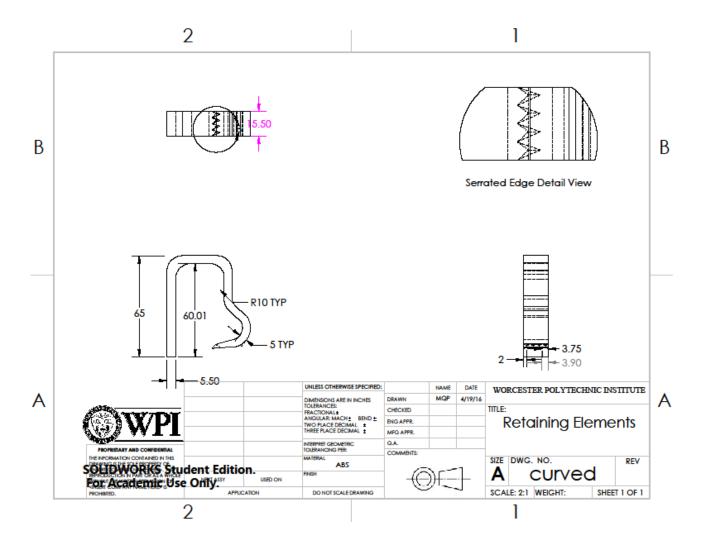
Solidworks drawing for the Retaining Element of Final Design
